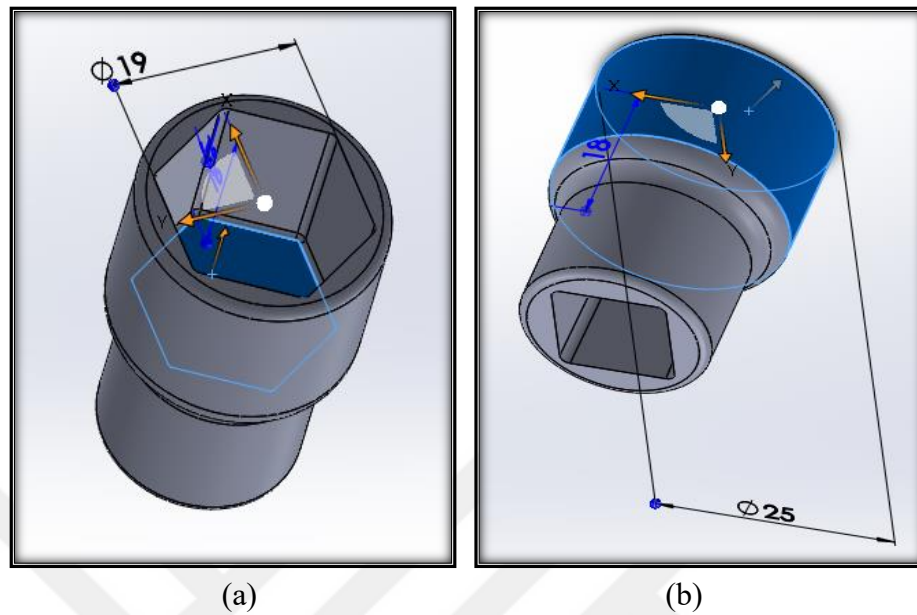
Final product shape: (a) Hexagonal side shape produce by backward extrusion; (b) Square side shape produced by forward extrusion
